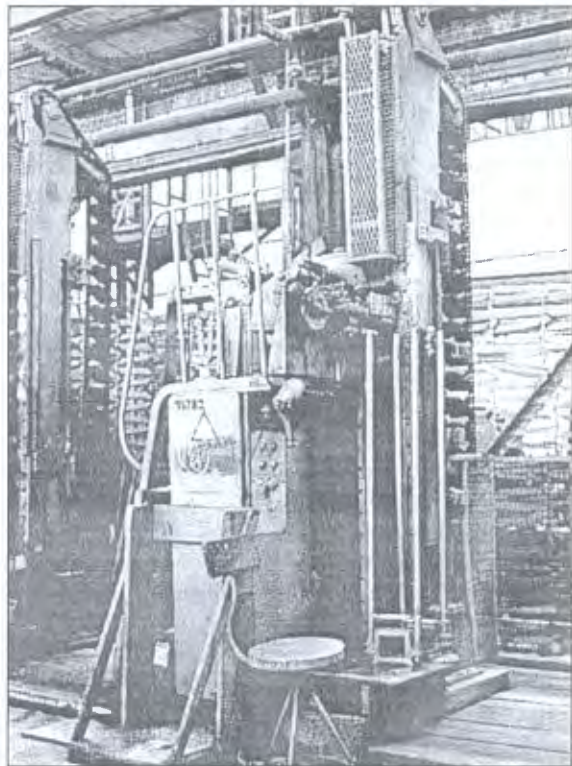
Automatic machine for assembly of semi-packs of radiator sections
